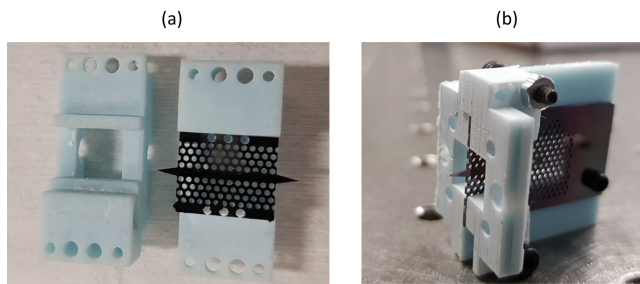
Pictures of the fabricated 3D printed housing jigs: (a) Top view of the split housing block and (b) perspective view of the mounted silicon circuit in housing block.
